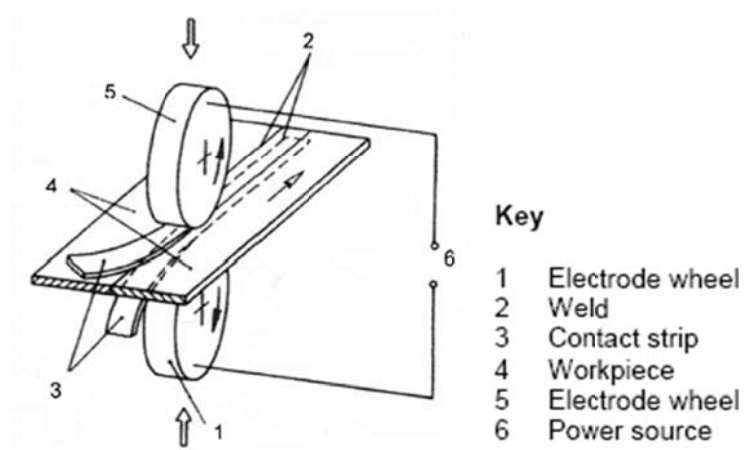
Foil butt-seam welding (ISO 669)
